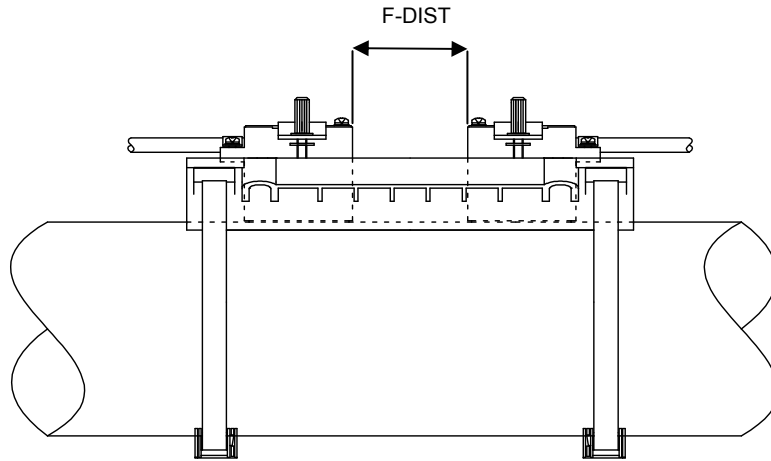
Mounting method for a transducer mounting interval (F-DIST) of less than 50 mm
